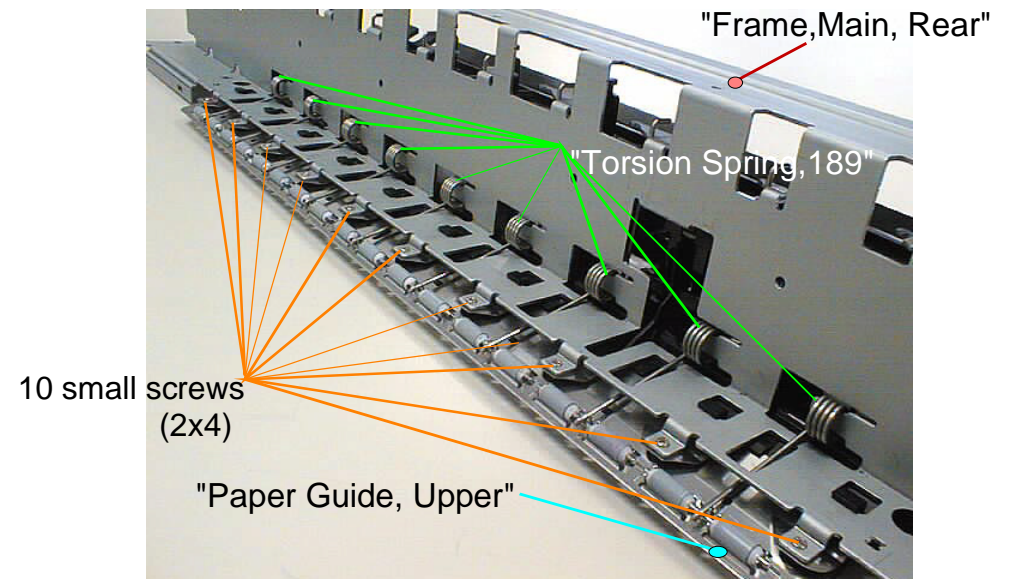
Separating "Frame, Main, Rear" and "Paper Guide, Upper"
